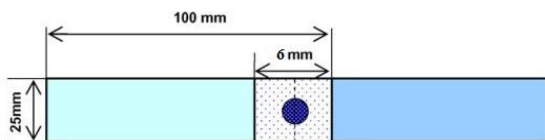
ASTM standards (D 1002 – 01) [14] for weld specimen (all dimensions are in mm)
